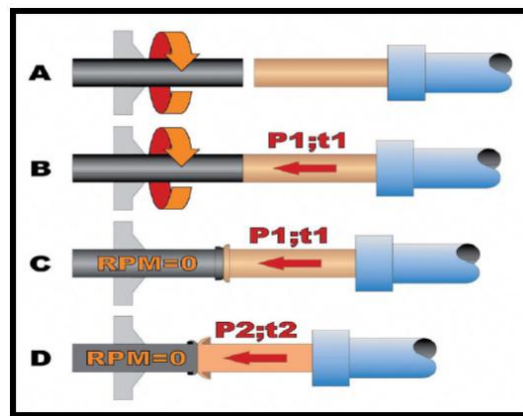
phases of conventional friction welding process. (A) Two parts one is rotating and the other is stationary. (B) applied friction pressure (P1) for a friction time (T1). (C) Braking the machine (RPM=0) flash begin formed. (D) Applied forging pressure (P2) during forging time (T2) and finish welding
